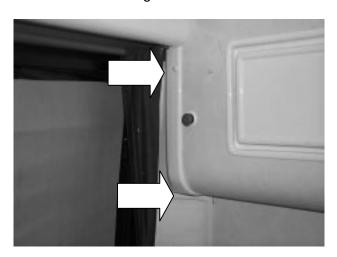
Corner trim molding screws. Note screw head buttons. These need to be removed first.
